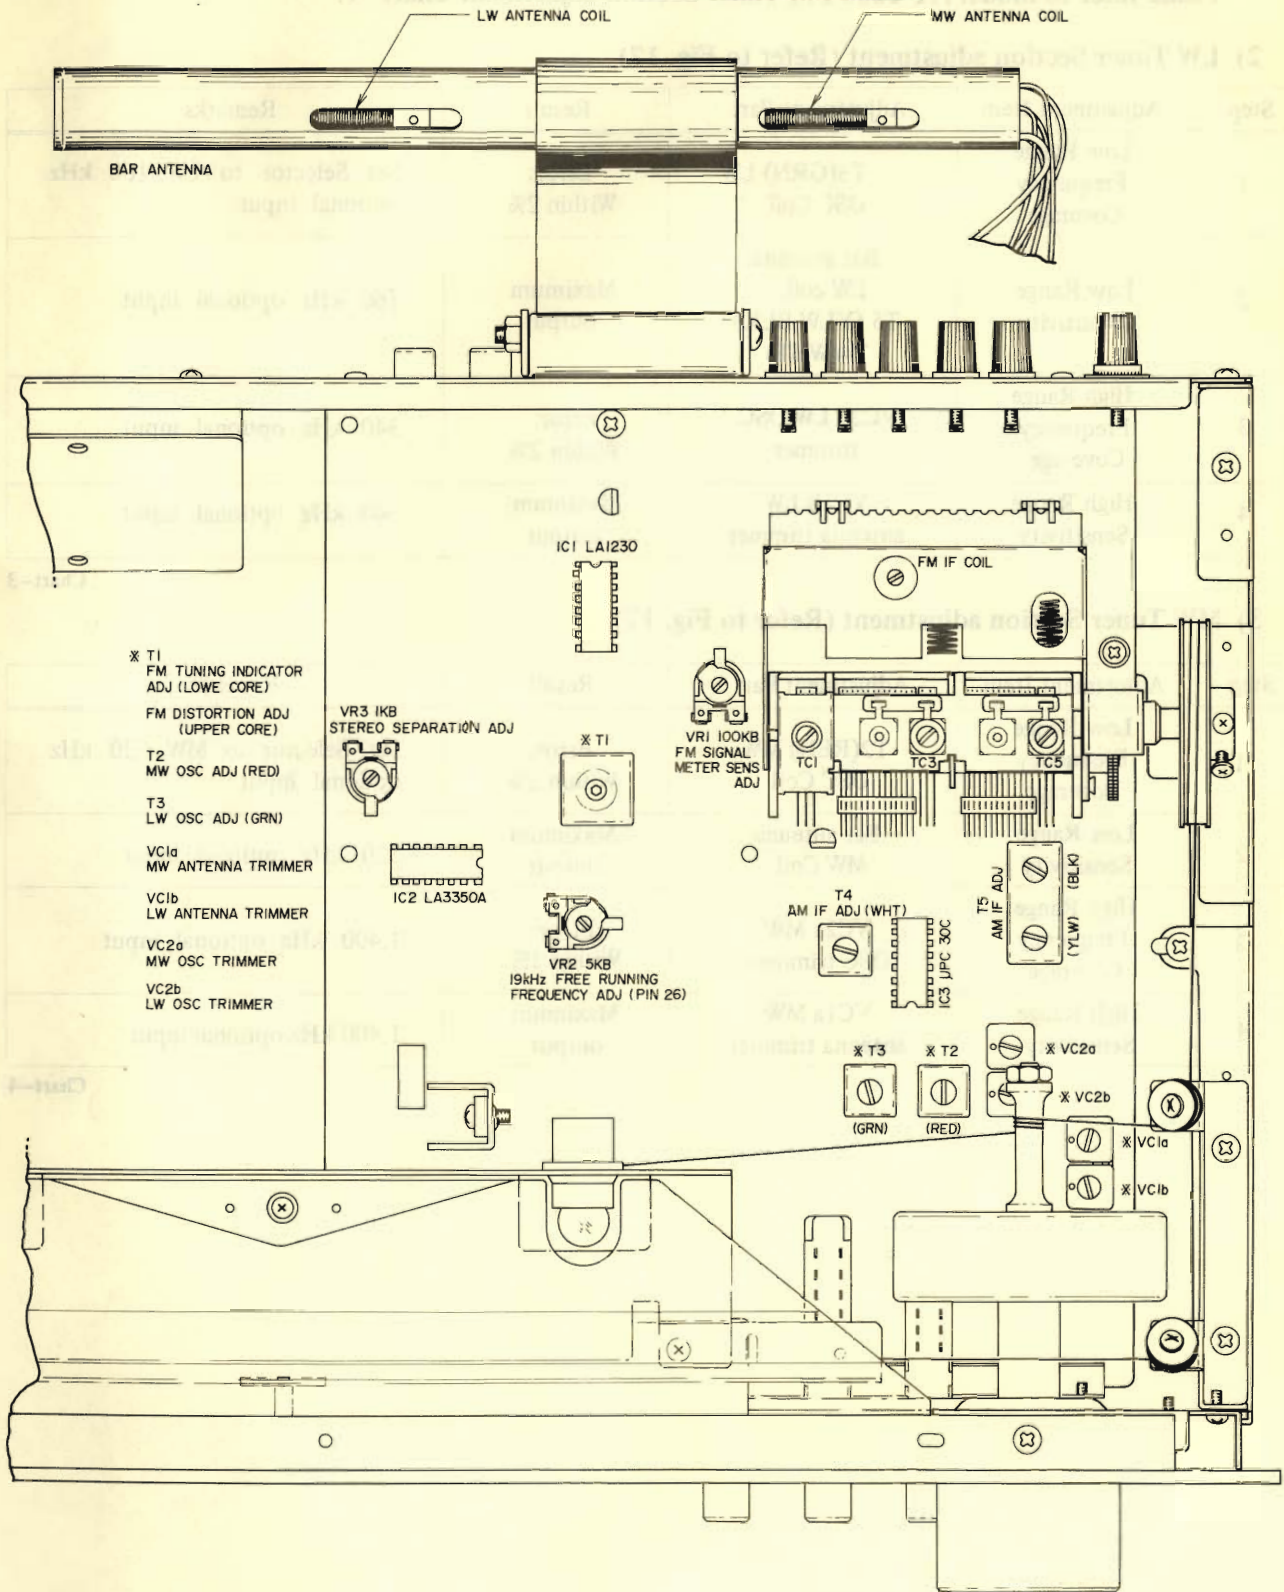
AT-2200L Tuner P.C Board T2-5031A
